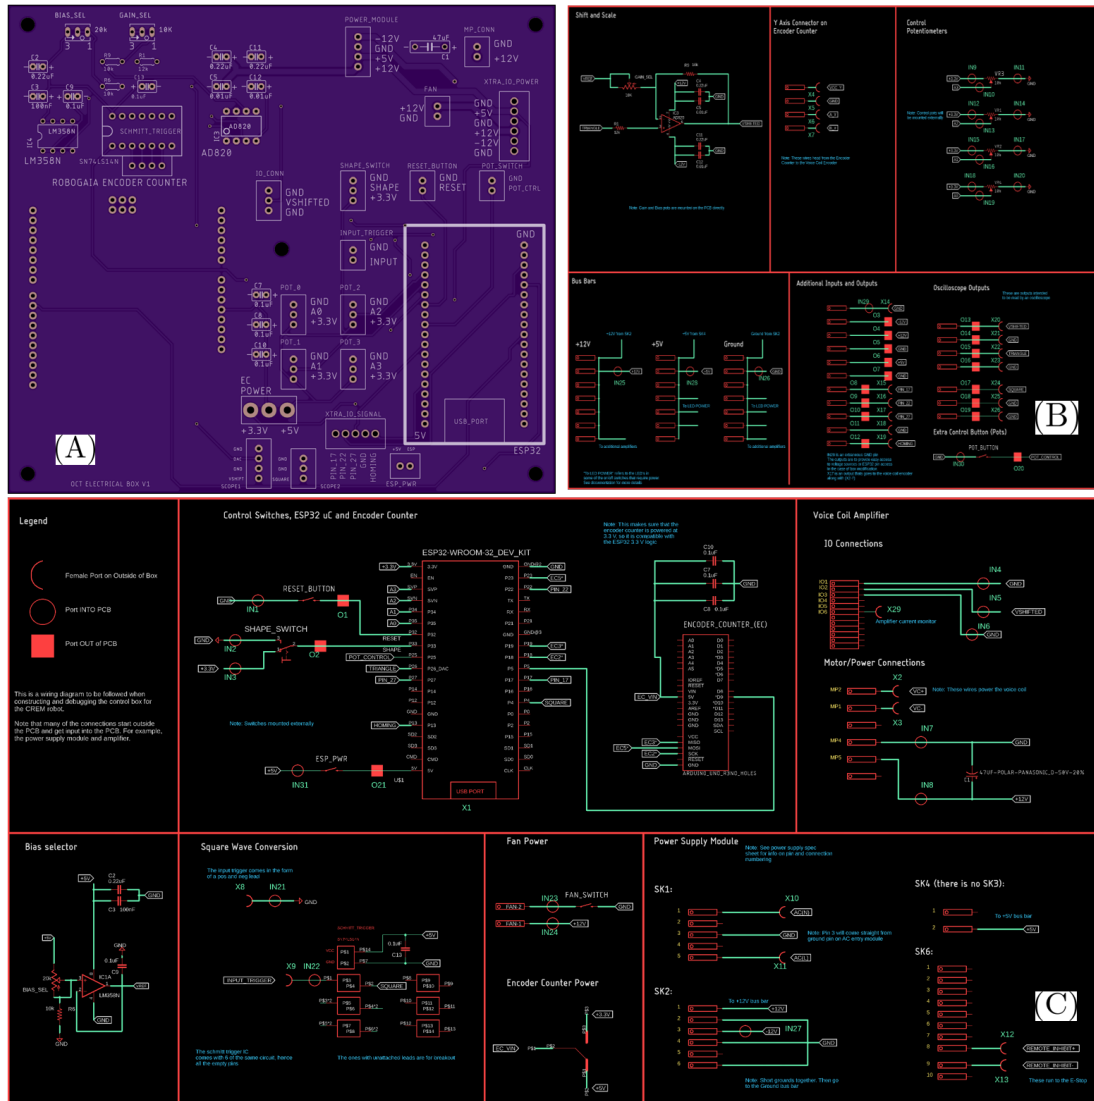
Custom design PCB: (A) Printed PCB (B-C) Schematic plots
